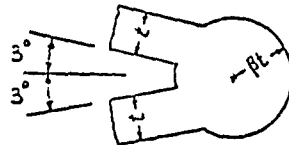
"INCLINED" WELD DESIGN
